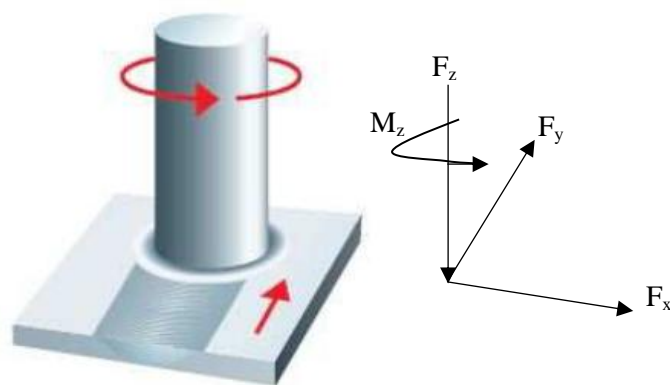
Schematic Layout of Forces Related to Friction Stir Welding
